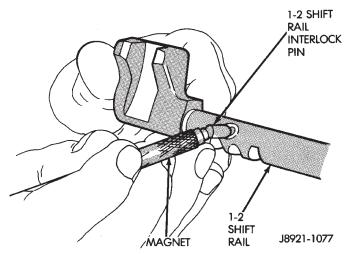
Install 1-2 Shift Rail Interlock Pin
